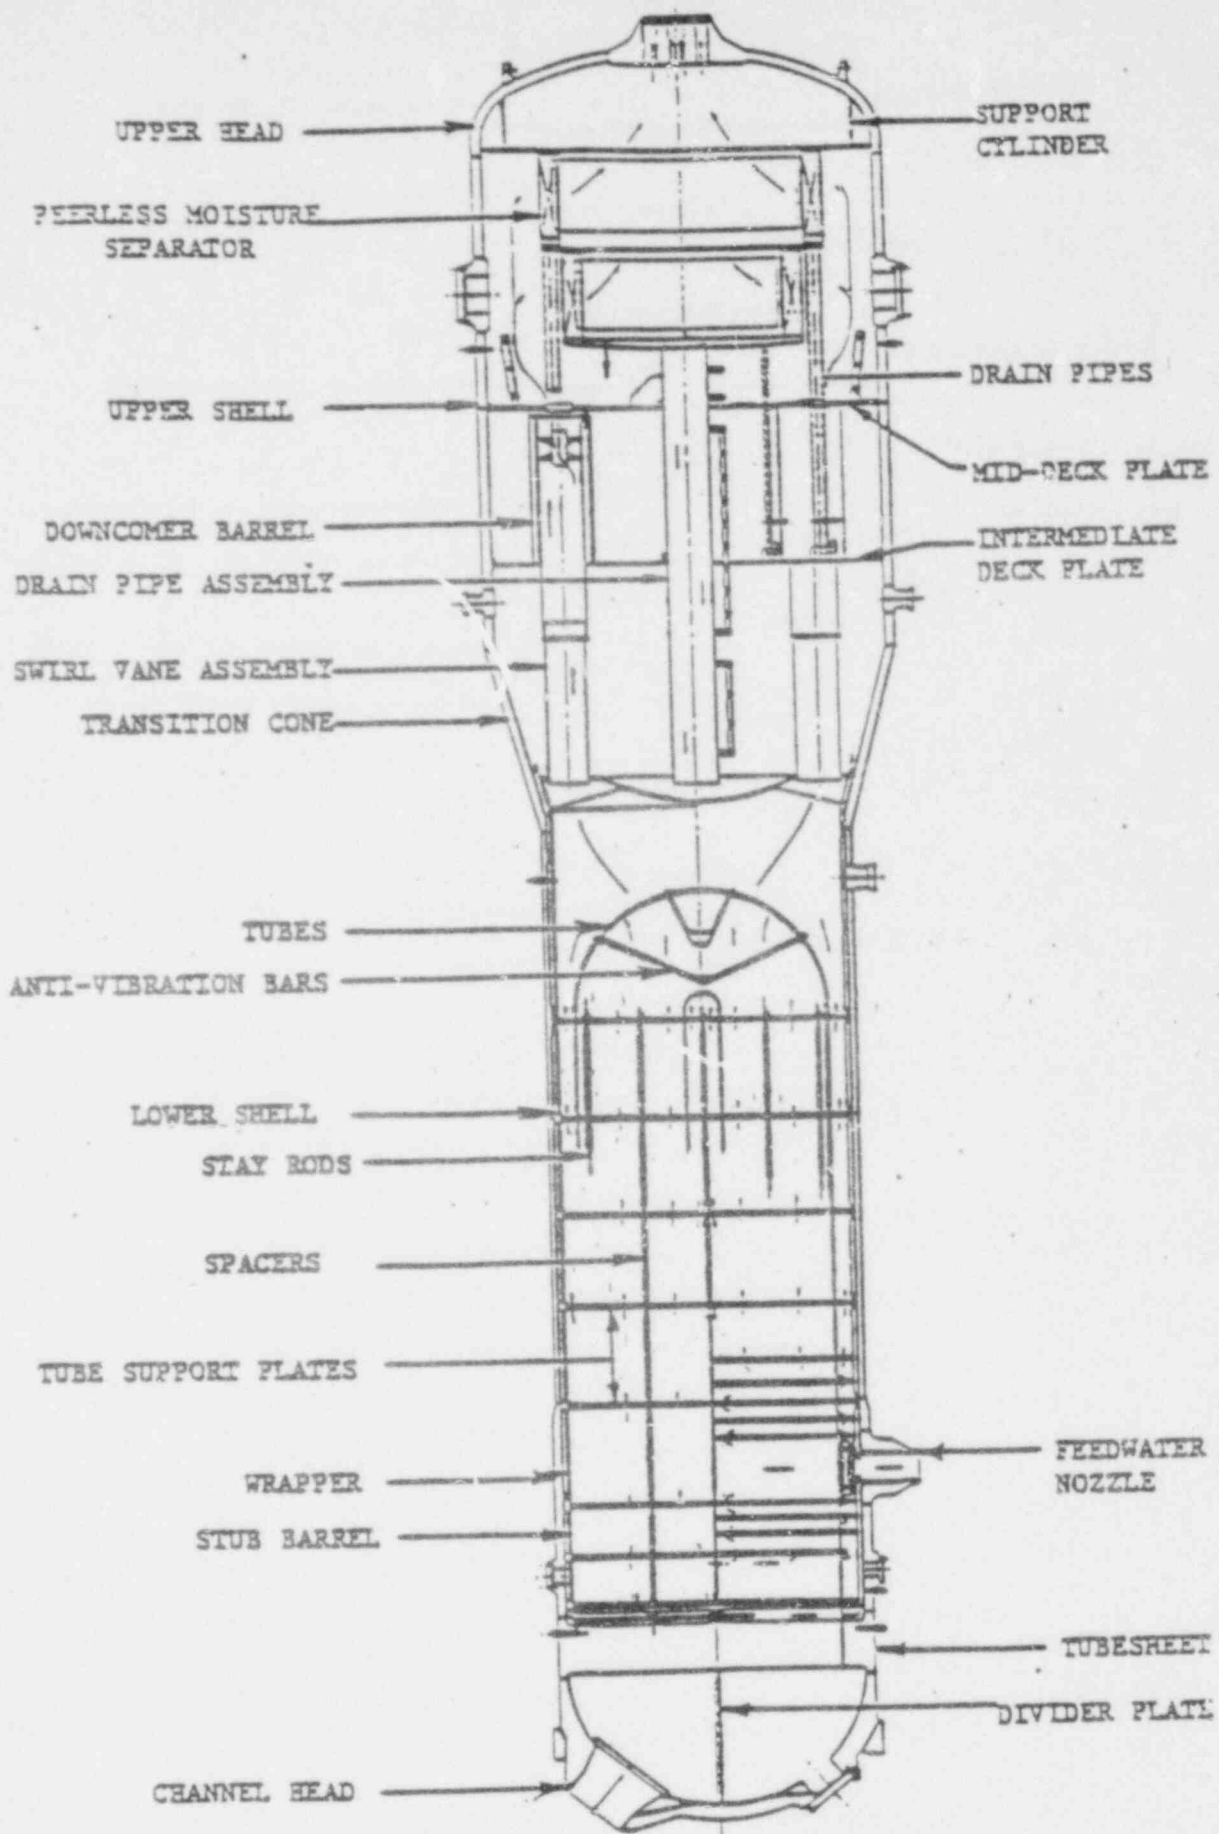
Typical Sectional View of a D3 Steam Generator
